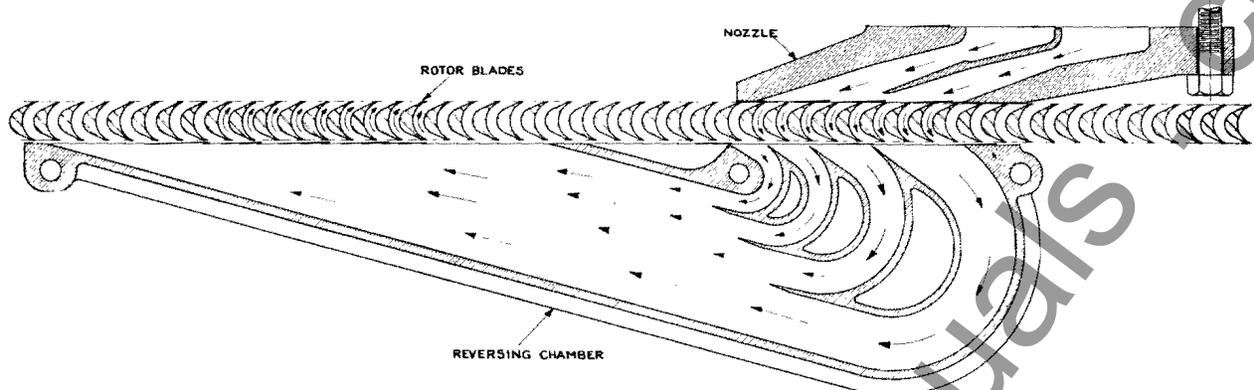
DEVELOPED SECTION THROUGH NOZZLE BLOCK AND REVERSING CHAMBER, SHOWING PATH OF STEAM
